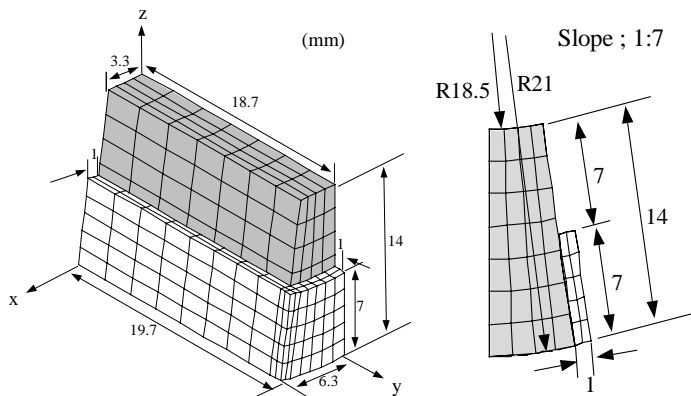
Finite element mesh , dimension of preform and geometry of the punch
